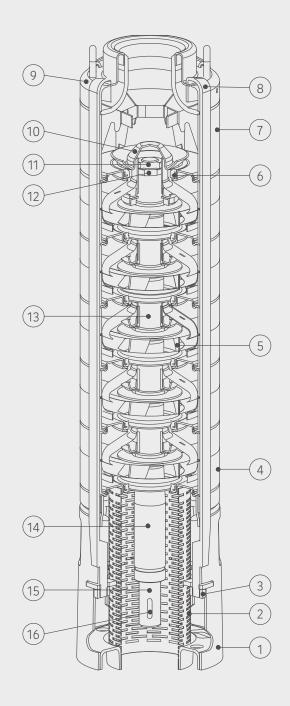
Cross-section view of 6 inch mixed flow borewell submersible pump
